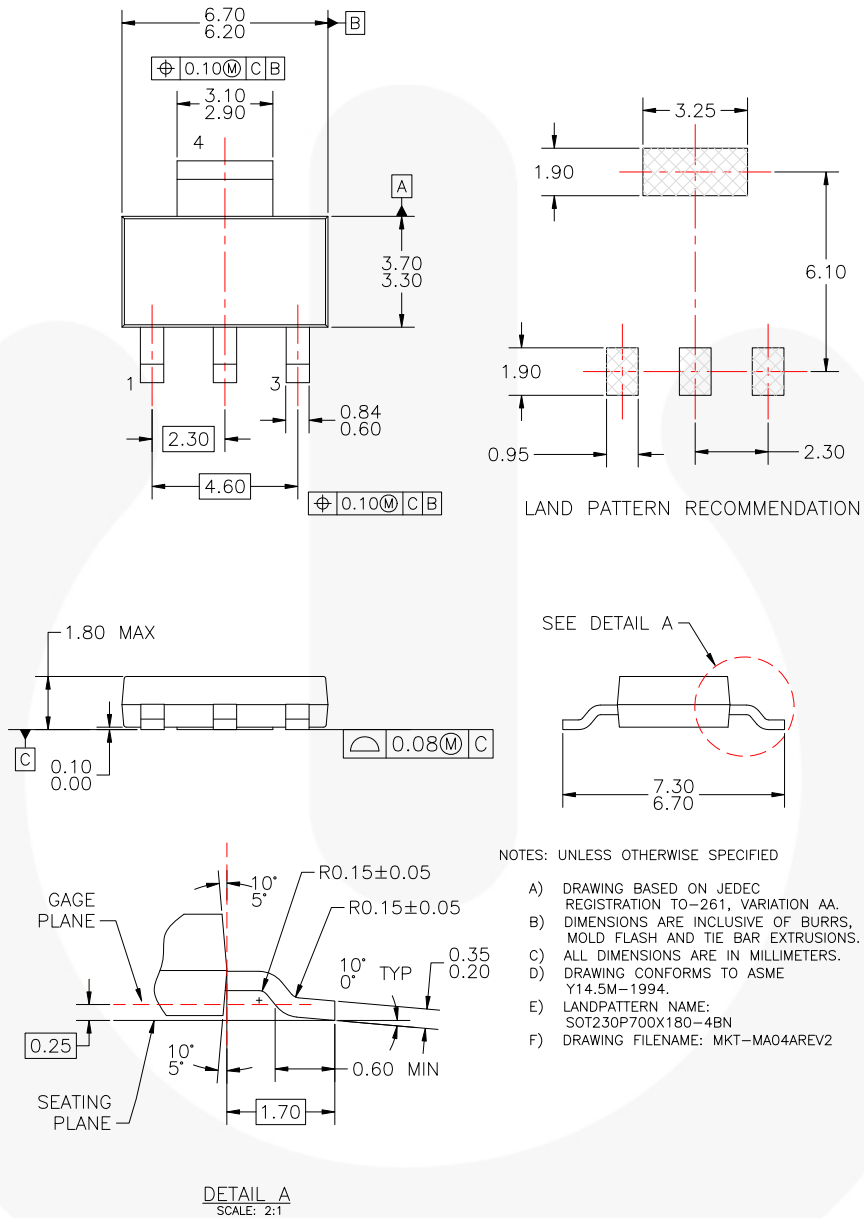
MOLDED PACKAGING, SOT-223, 4-LEAD
